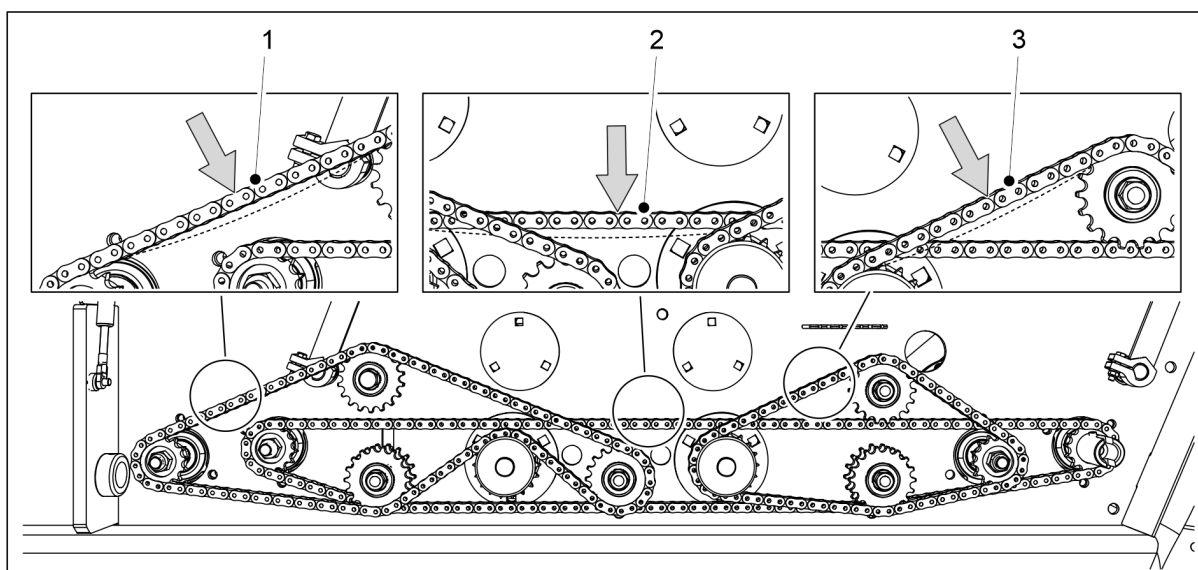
223. Checking chain tightness, fertiliser and seed transmission
